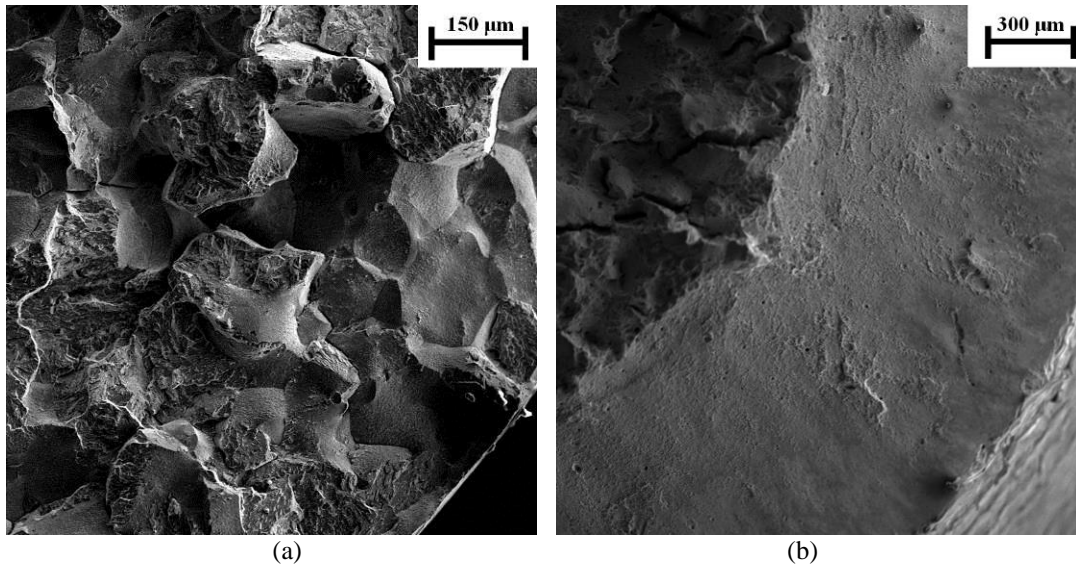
Tensile fracture surfaces of the D bloom samples. (a) Intergranular fracture of the as-received sample aged at 550 °C for 2.5 h; (b) ductile fracture of the RHT sample aged at 550 °C for 2.5 h.
